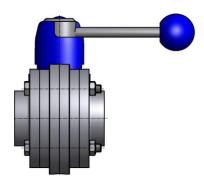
Butterfly valve SV04 BF DIN/inch Art.-No.: 56040/56004
